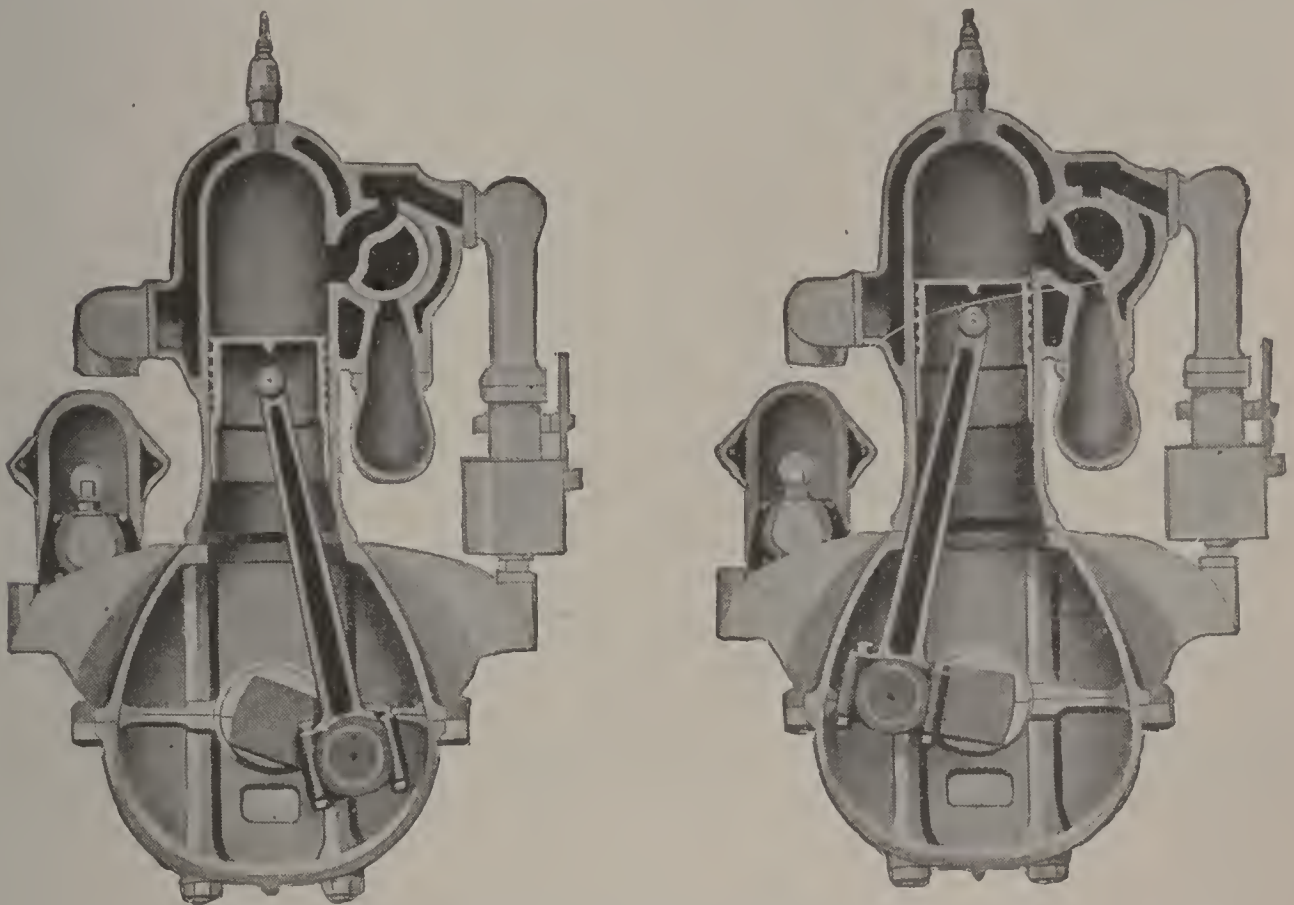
Sections of Darracq Rotating Valve Motor, Showing Intake Position (left) and Exhaust Position (right)
